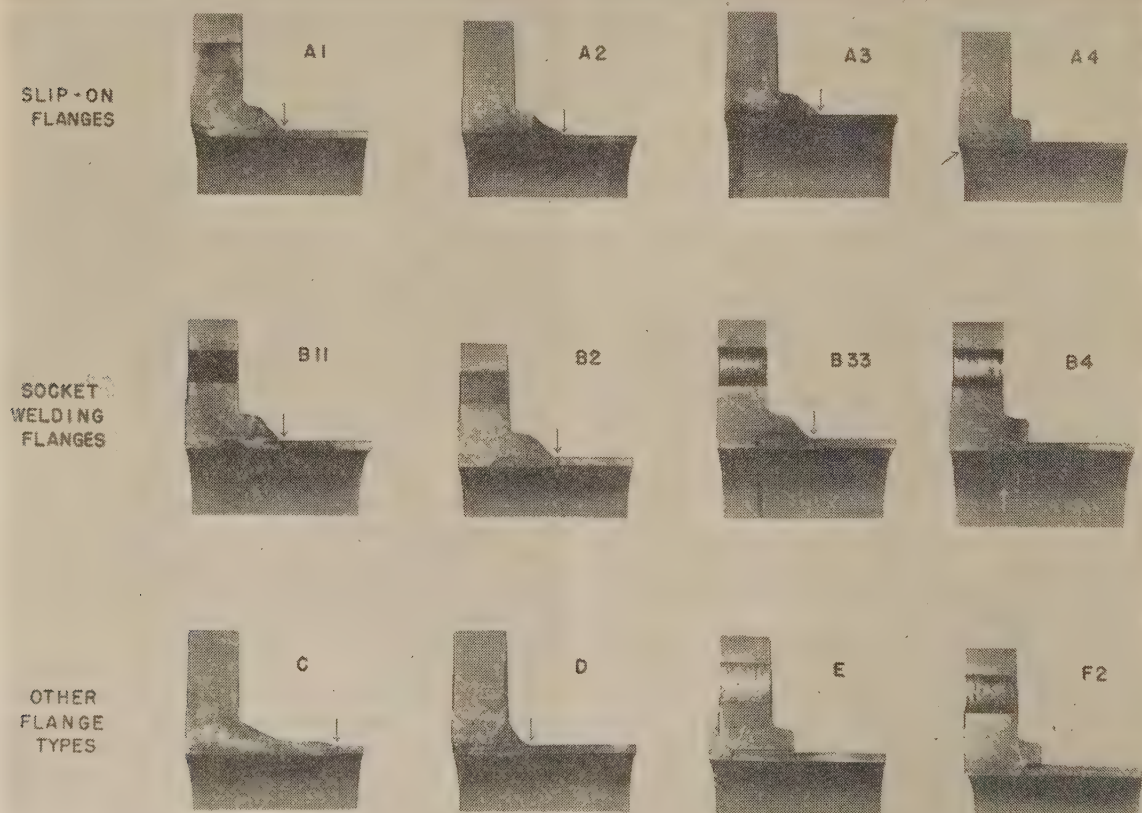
PHOTOMACROGRAPHS OF REPRESENTATIVE FAILED SPECIMENS
